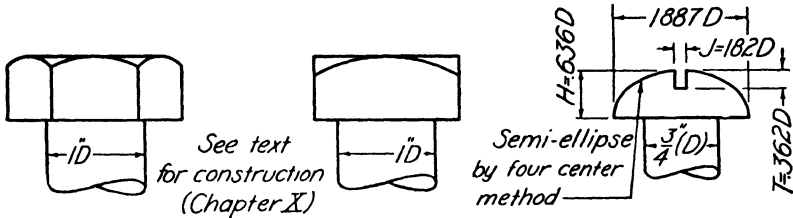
Hex. bolt head. FIG. 30. Square bolt head. FIG. 31. Round head (screw).
